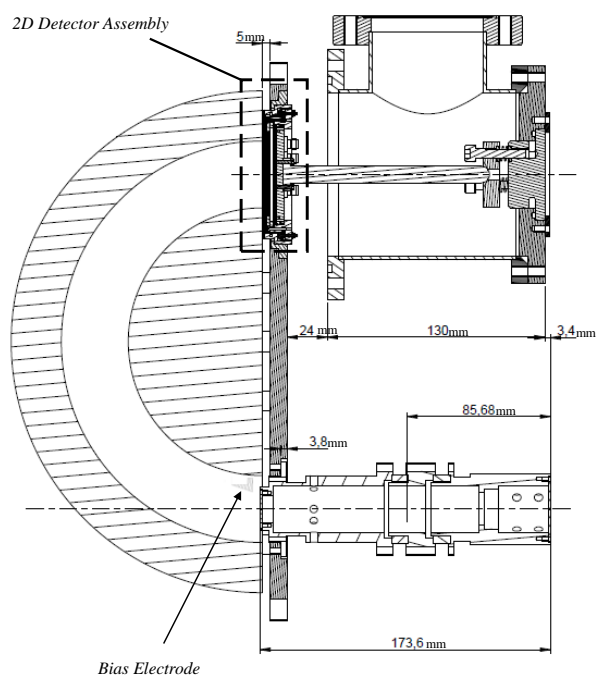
The cross-sectional view of the hemispherical analyzer housing the new 2D detector assembly.
